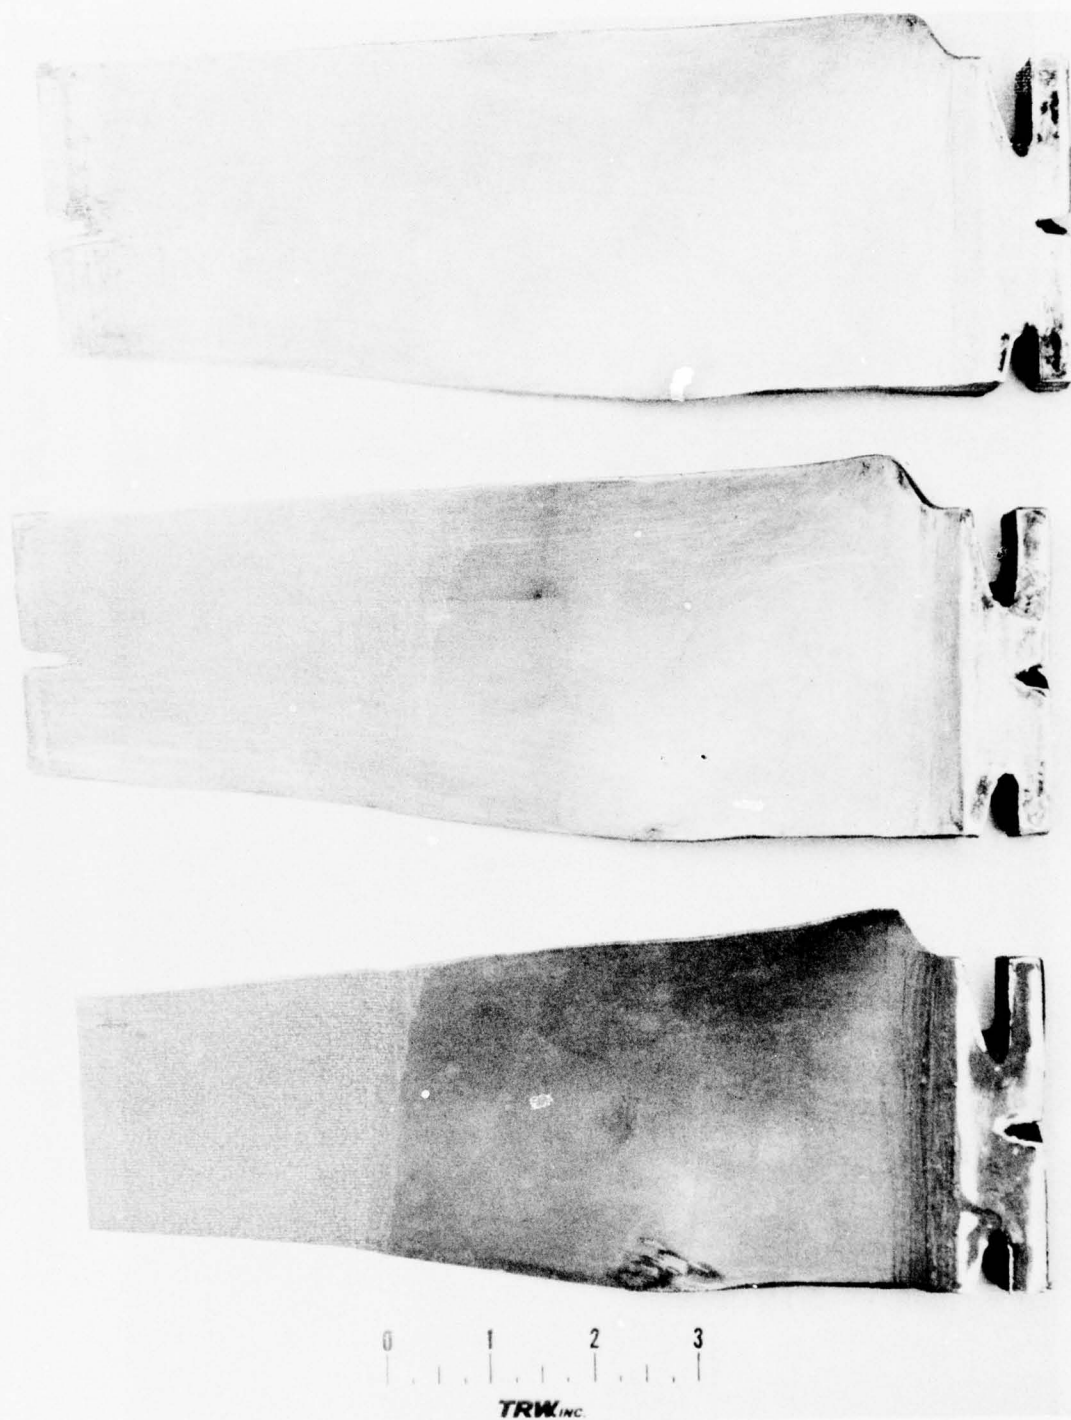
Air Bonded Boron-Aluminum J101 Fan Blades Fabricated by TRW.
